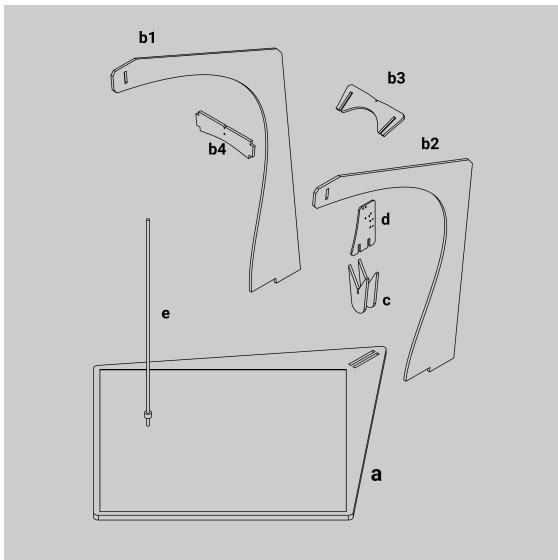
Exploded diagram of the final version: a - base; b - arc structure; c - “V-shape” element; d - PCB; e - pendant
